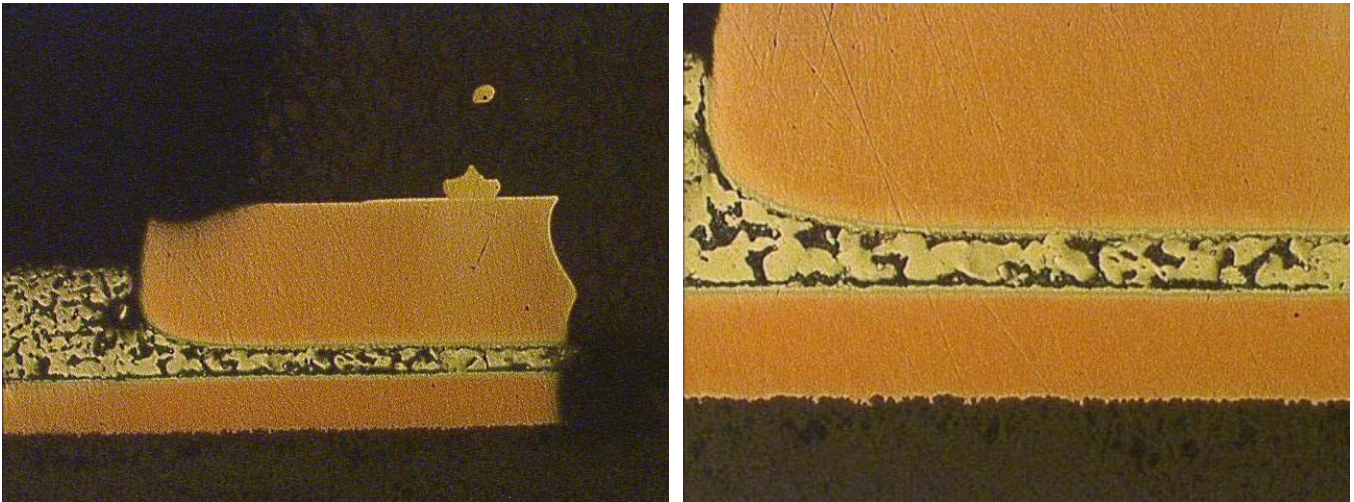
QFN-20 Solder Joints, Board 6, Component U27, SnPb/Sn Dipped, Did Not Fail (DNF)
